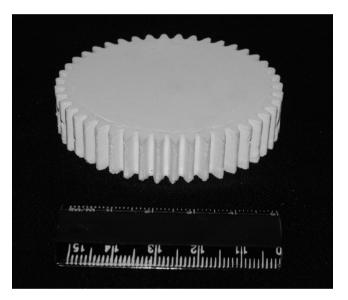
Photograph of sintered alumina spur gear fabricated by the direct coagulation casting.
